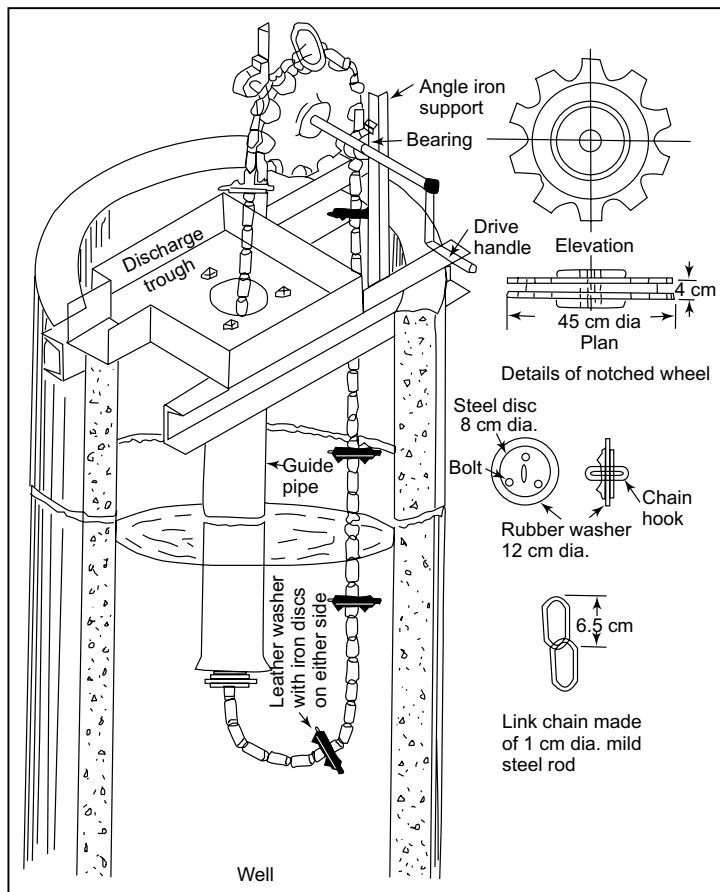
Isometric view of a chain pump installed in a small diameter open well. (The well is shown in section)
